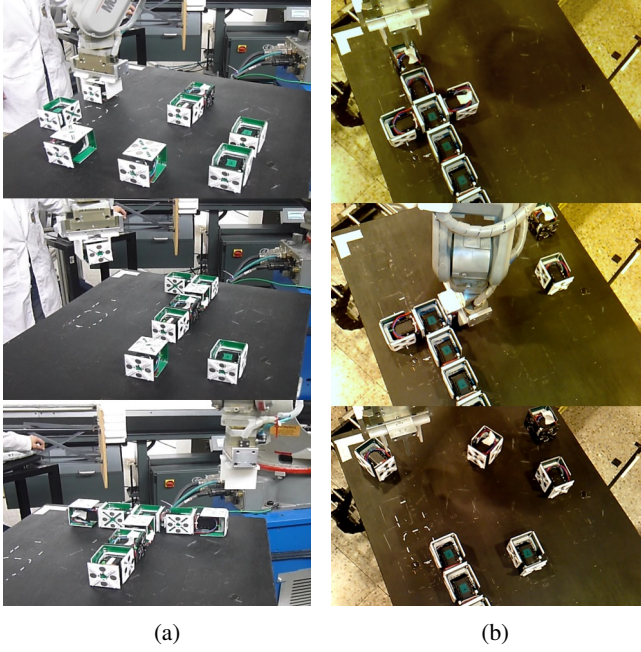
Assembly and disassembly process carried out in the repeatability test with the active gripper. (a) shows three frames of an assembly process with an 8 module configuration. (b) shows three frames of a disassembly process with another 8 module configuration.
